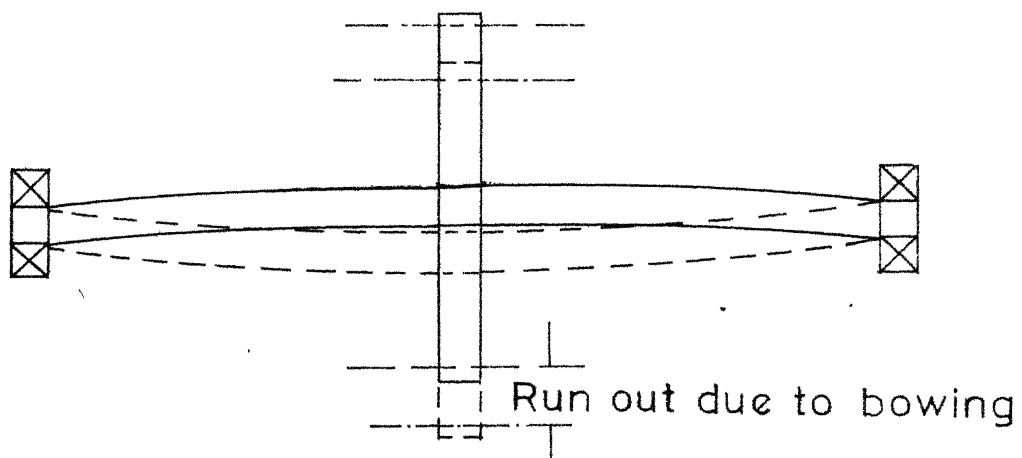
SHAFT RUNOUT AT GEAR MOUNTING.
